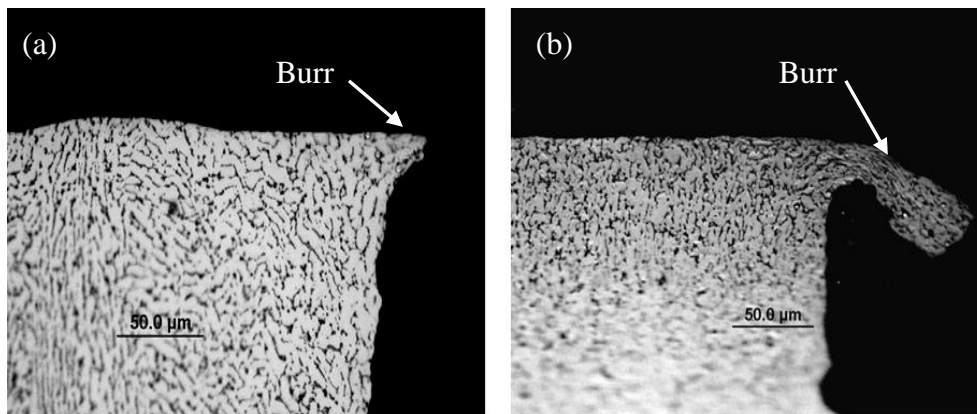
Exit burr formation for steady stage of tool wear (a) Helical milling (b) Drilling
